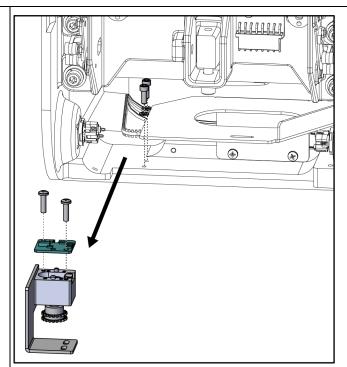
Magnetic Rotary Encoder Board Assembly inside Tube Arm Assembly
